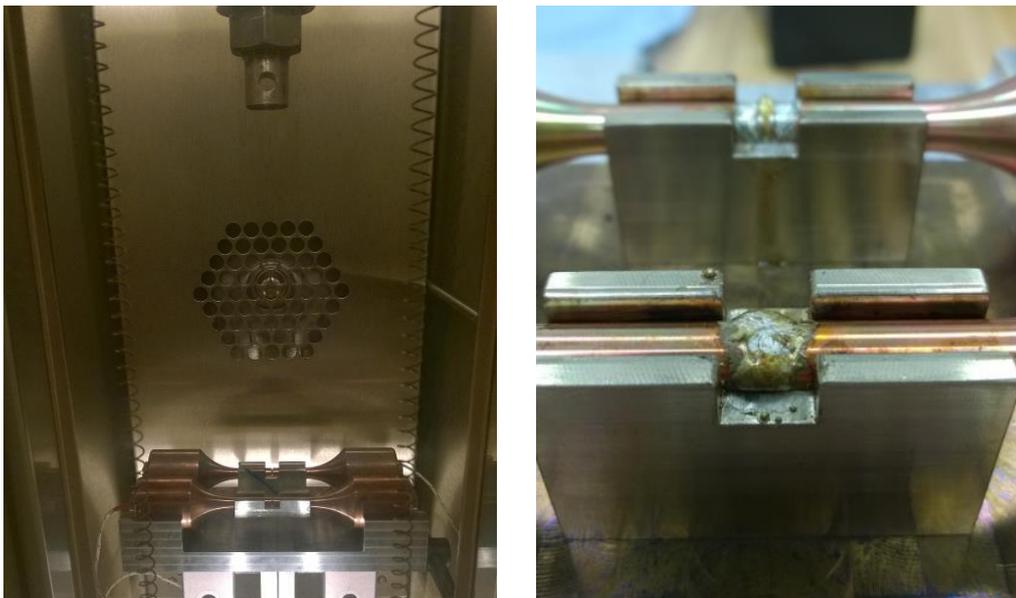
Soldering at temperature chamber on the left and cooling after soldering on the right
